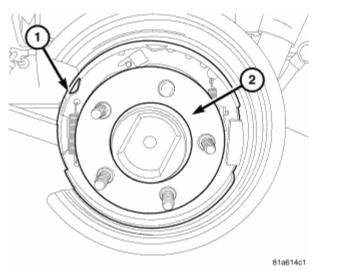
Identifying Rear Park Brake Shoes & Axle Shaft Courtesy of CHRYSLER LLC
